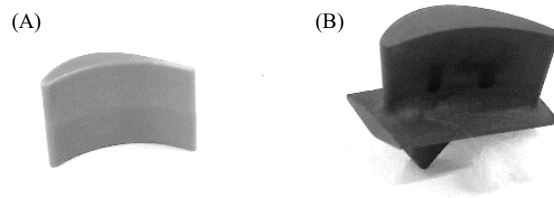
(A) Straight CeramTec SL200BG blade used in the flexible-hub prototype and (B) 5-axis machined Kyocera SN235P blade used in the sliding-blade prototype
